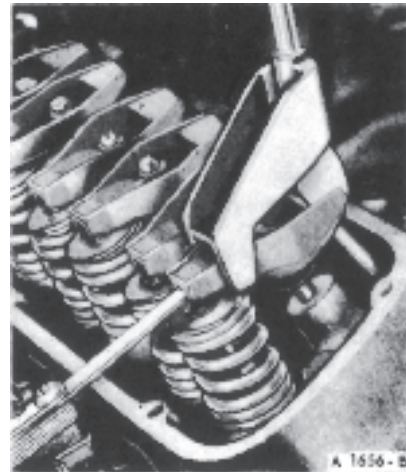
Checking Valve Clearance-Hydraulic Valve Lifters
